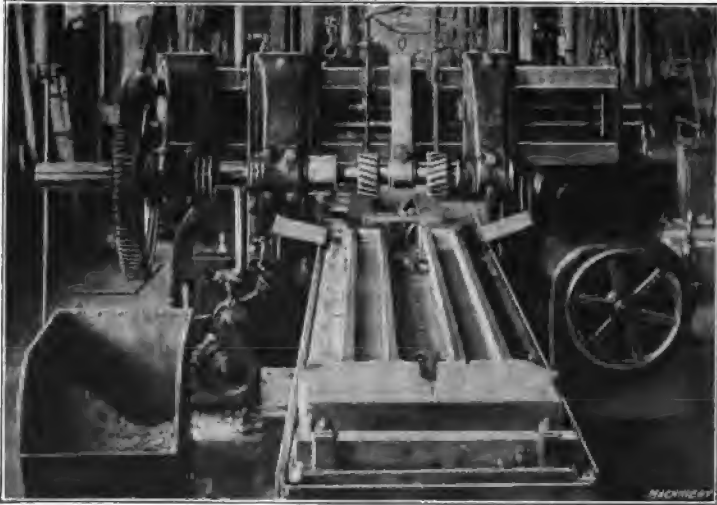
Channeling the Sides of Locomotive Main-rod on Horizontal Machine
